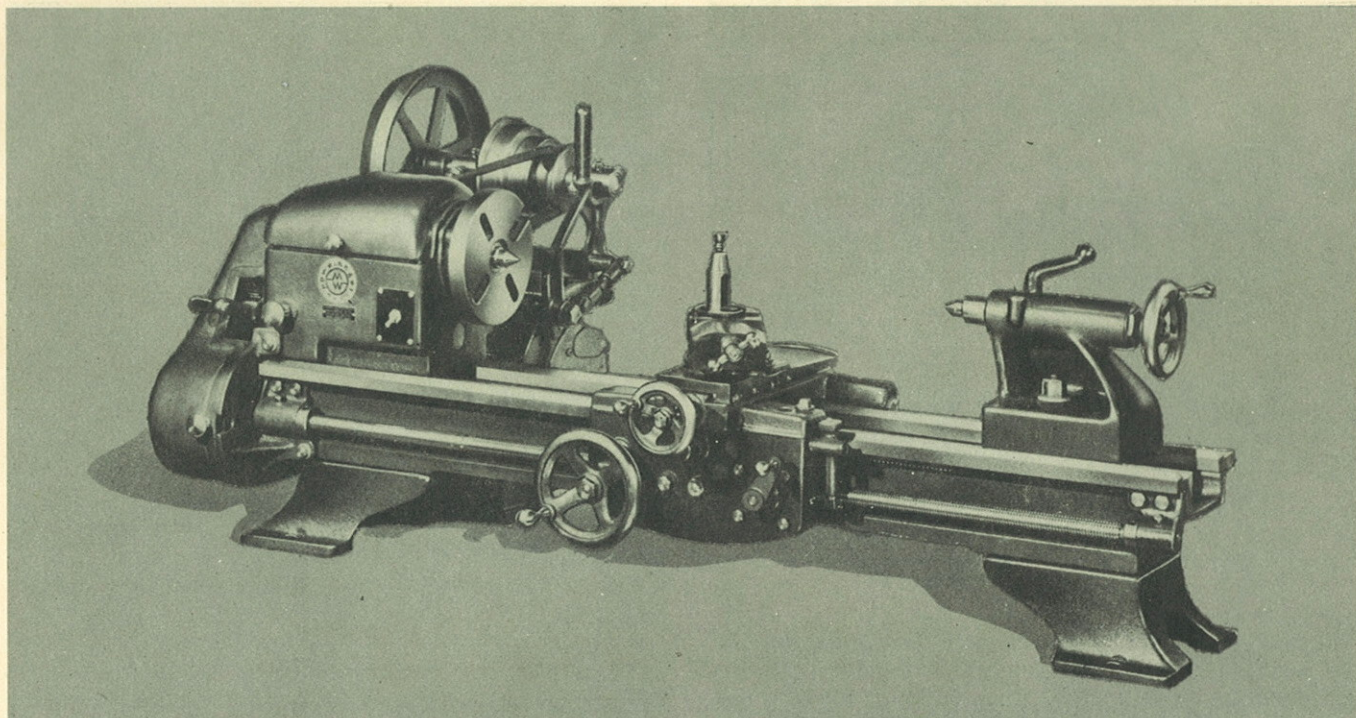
WARDS POWR-KRAFT BACK GEARED, SCREW-CUTTING LATHE FOR BENCH MOUNTING
